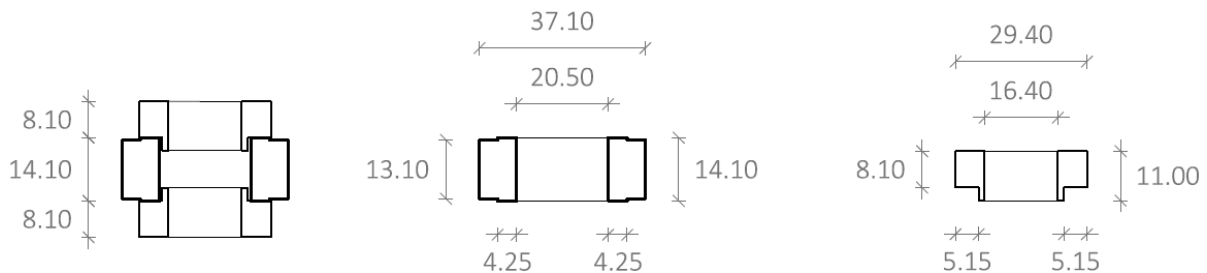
Dimensions [mm] Load Cell and adapter ring
